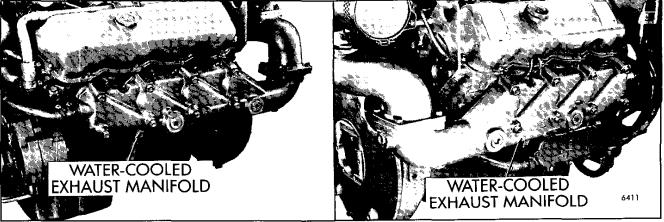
Typical Water-Cooled Exhaust Manifolds - Left Bank and Right Bank
